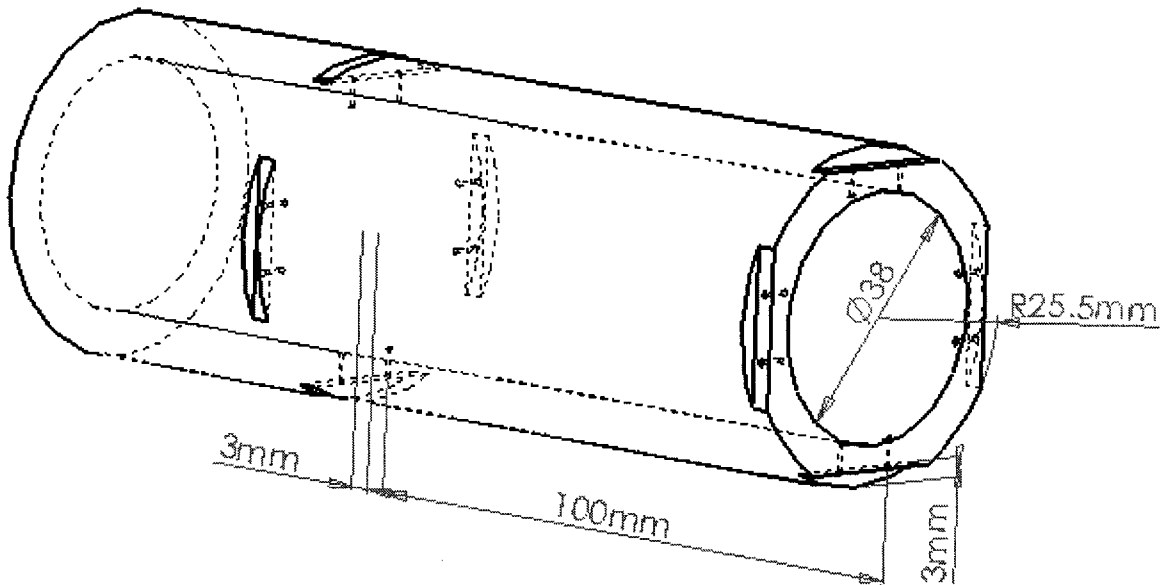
Sketch of section of inner cylinder core showing slots cut out for thermocouple placement
